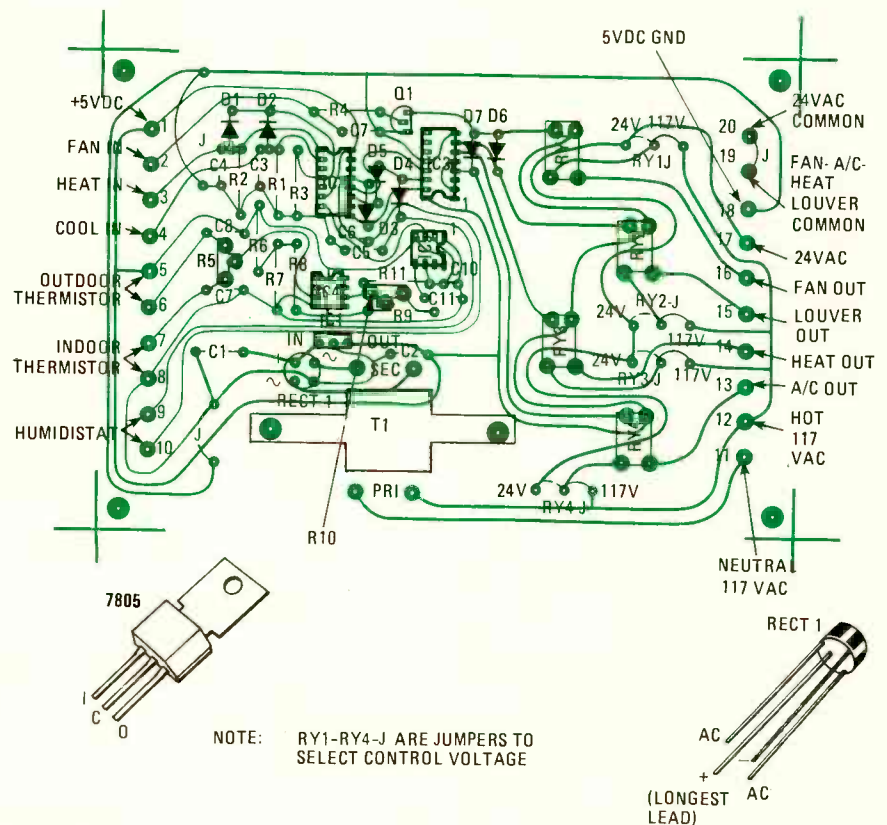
PARTS LAYOUT for the Control Center. Outboard humidistat is connected to pads 9 and 10.
